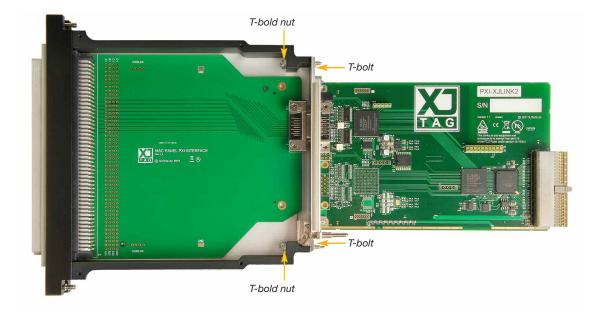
Fitting the PXI-XJLink2 to the interface board
